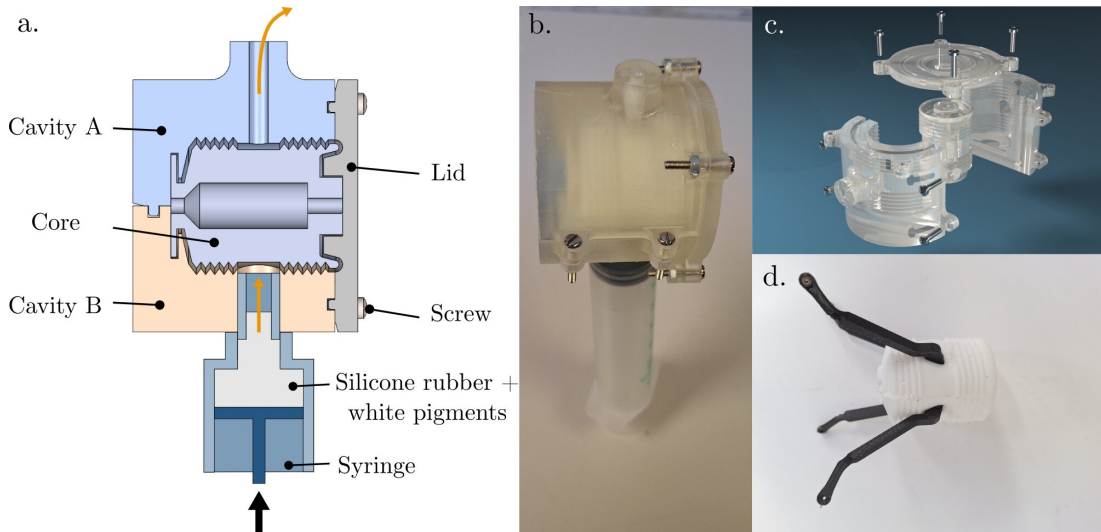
a. Cut view of the moulding assembly used to fabricate the protective membrane. b. 3D printed moulds connected to the syringe used to inject silicone. c. Three dimensional render of the different parts constituting the moulding assembly. d. Protective membrane obtained after the moulding process assembled to the lever arms.
